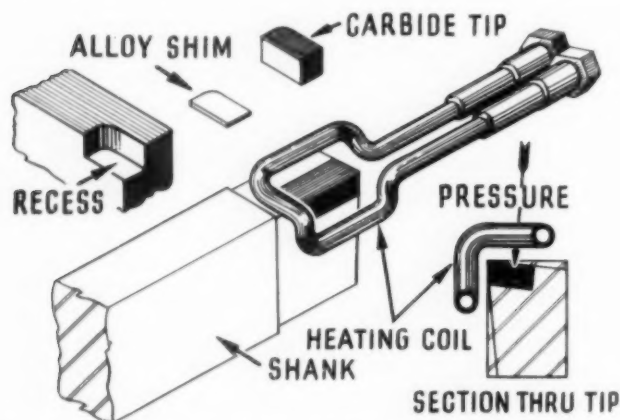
A typical type of coil used for silver brazing tungsten carbide tools, arranged so that heating is localized to the brazed areas.
